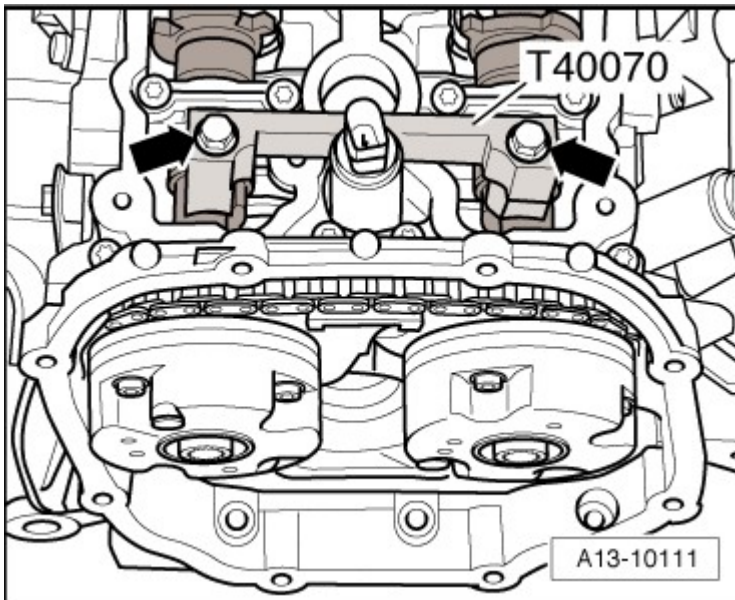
Mounting Camshaft Locating Tool T40070 To Both Cylinder Heads And Tightening Bolts
